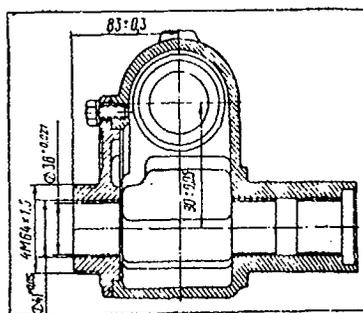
The housing of the steering mechanism assembled with cover and bushings, ZIL-157K
